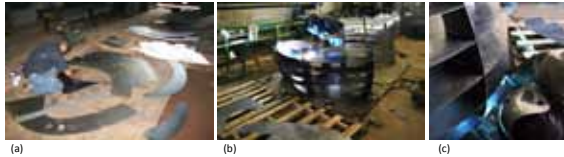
Assembling and welding process (photos by Wilson Barbosa).
